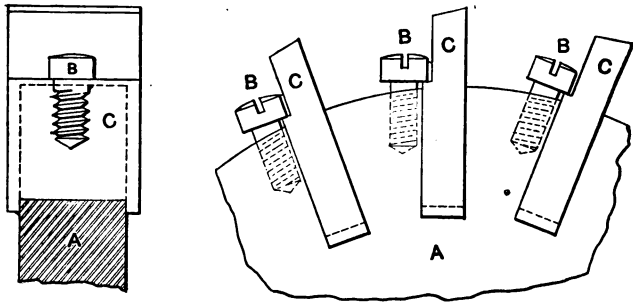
Simple Method of Securing Blades in Inserted Blade Cutter
